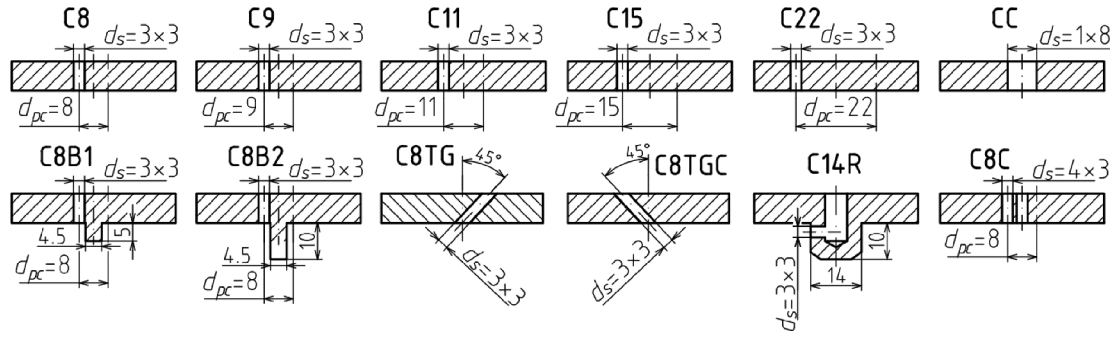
Schematic drawing of tested caps with main dimensions in millimetres.
